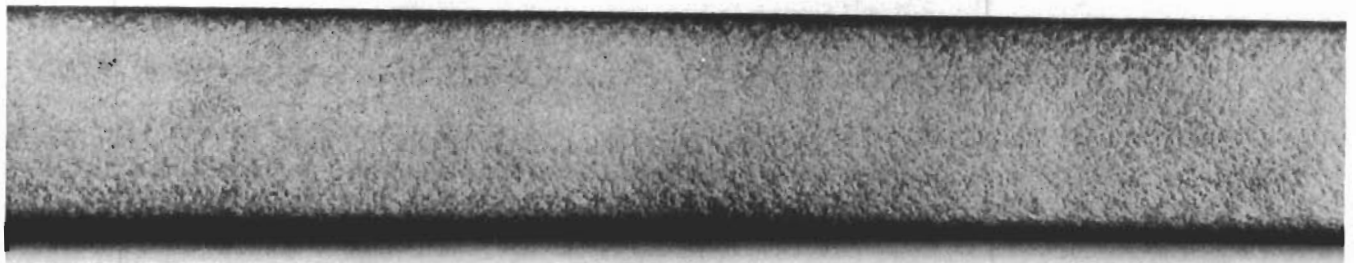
Surface of extruded channel after vapor blasting to remove glass lubricant. Vapor blasting appears to be more practical than chemical etch for the removal of the glass.
